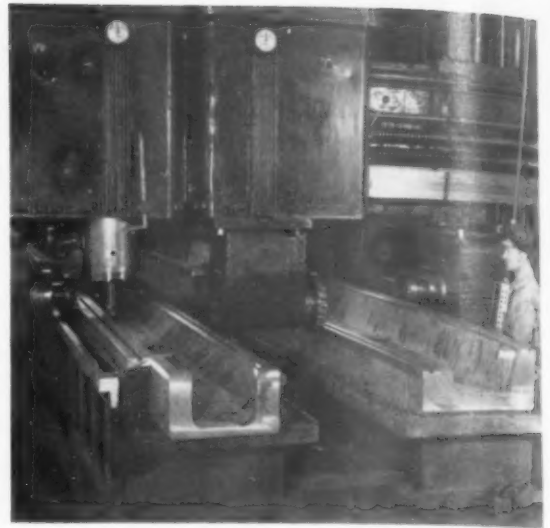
Work and material handling is an important consideration in the design of machine tools. Shown here are four heads at work simultaneously on an Ingersoll adjustable rail milling machine.
